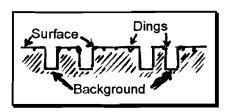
Cutaway view of surface of knob showing design with dings in it.
